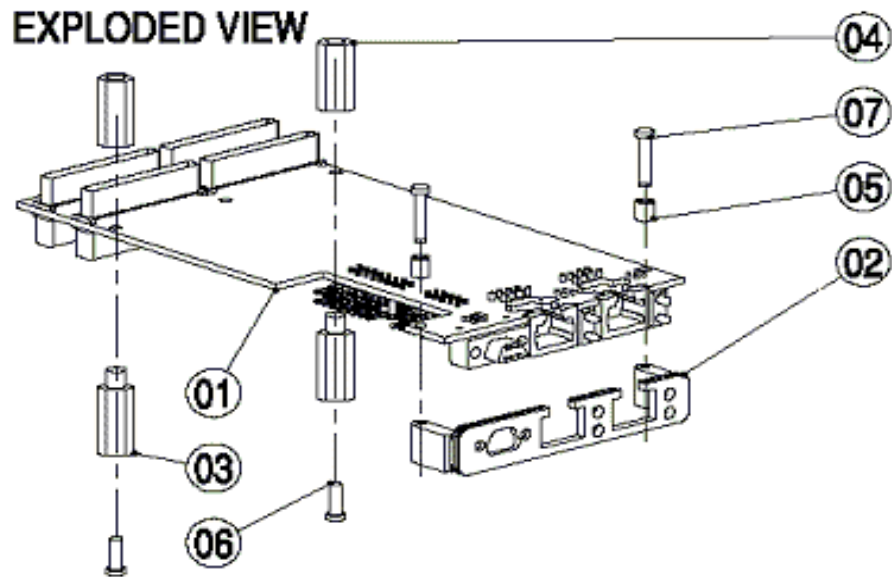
Top Assembly of PMC 270 transposer card, exploded view.
